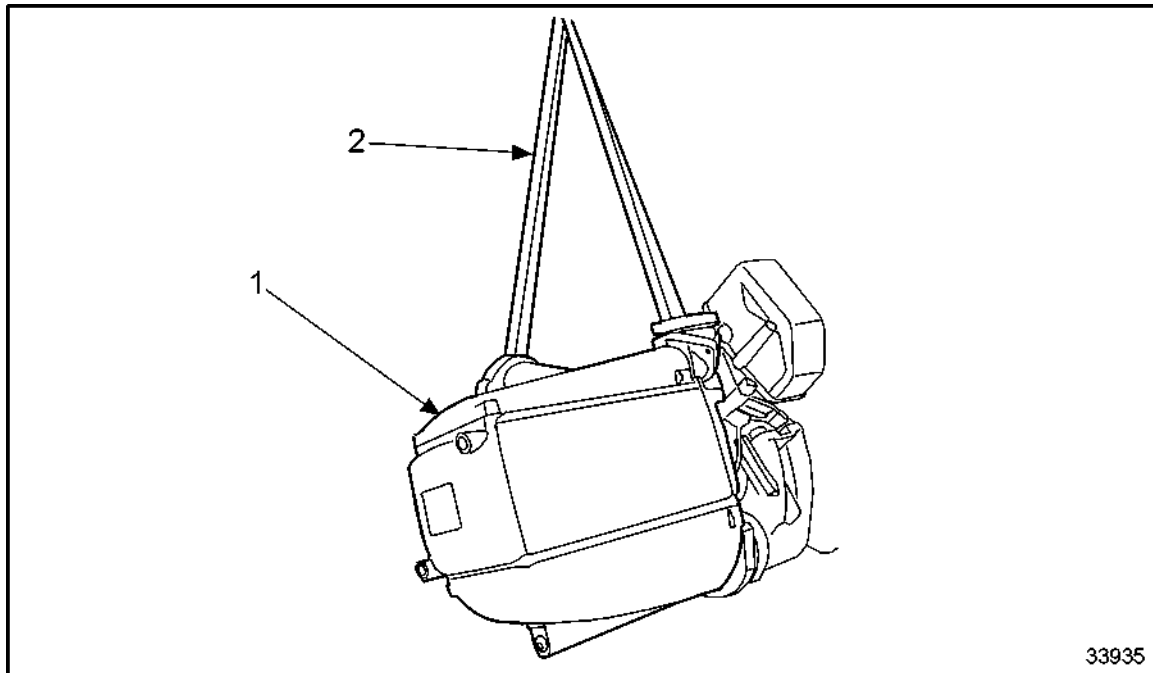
Installing Intake Manifold Flange to Charge Air Cooler
